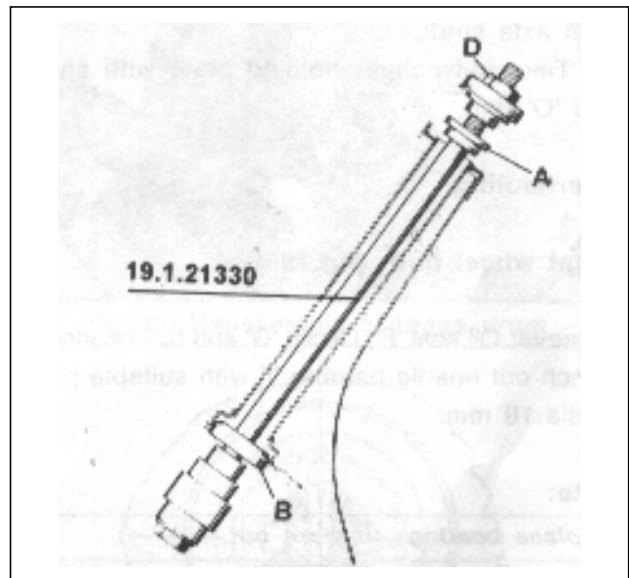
Fixture for assembling lower track and upper track on chassis stg. column tube
